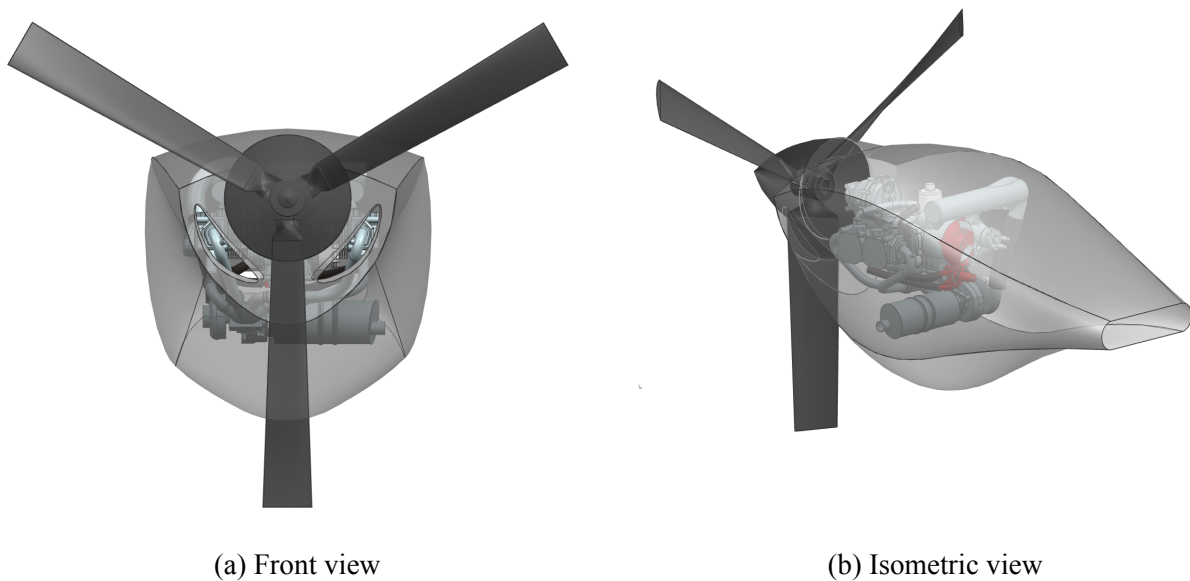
Solid CAD view of the engine compartment (in nacelles) of the BROL-42 which integrates proper air intake and exhaust areas.
